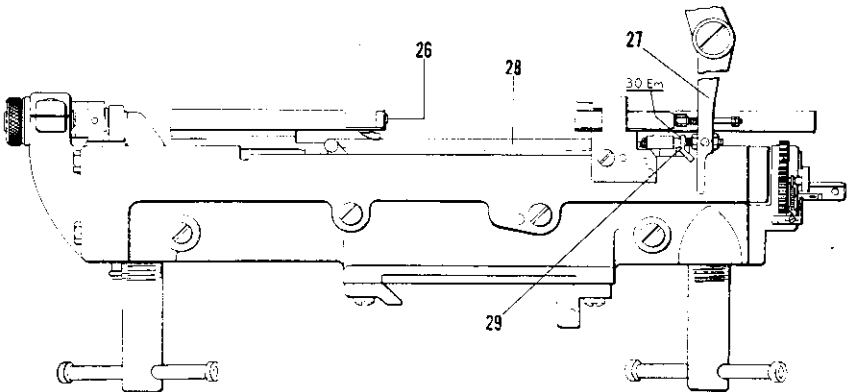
Top view of the vise cap and vise jaws showing the vise jaw left-hand safety detent and the pump stop operating lever mechanism.
